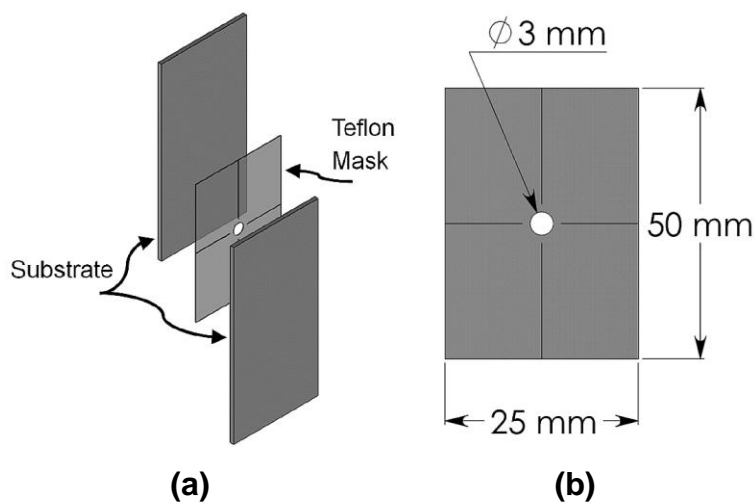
Schematic diagram of a lap-shear specimen assembly with dimensioned Teflon mask.
